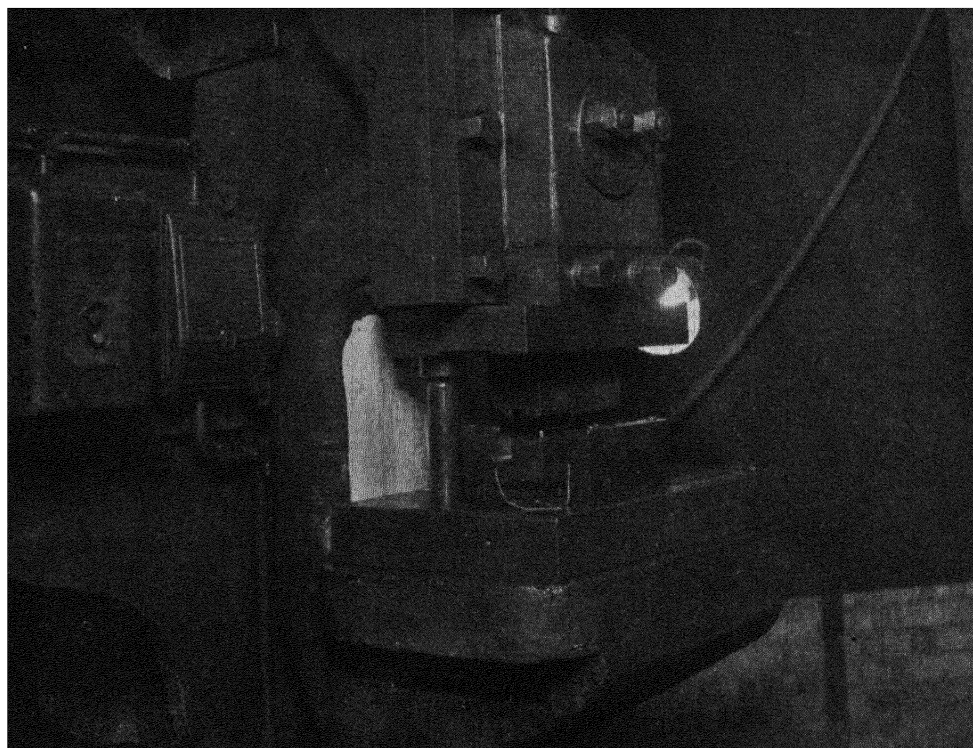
FORMING A “U”-SHAPED BRACKET FROM THE BLANK
